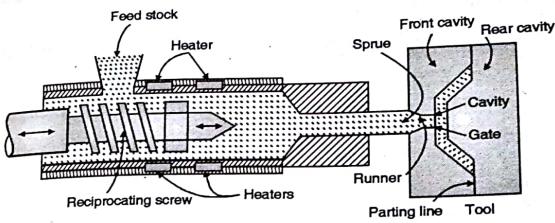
Schematic representation of powder injection moulding equipment
